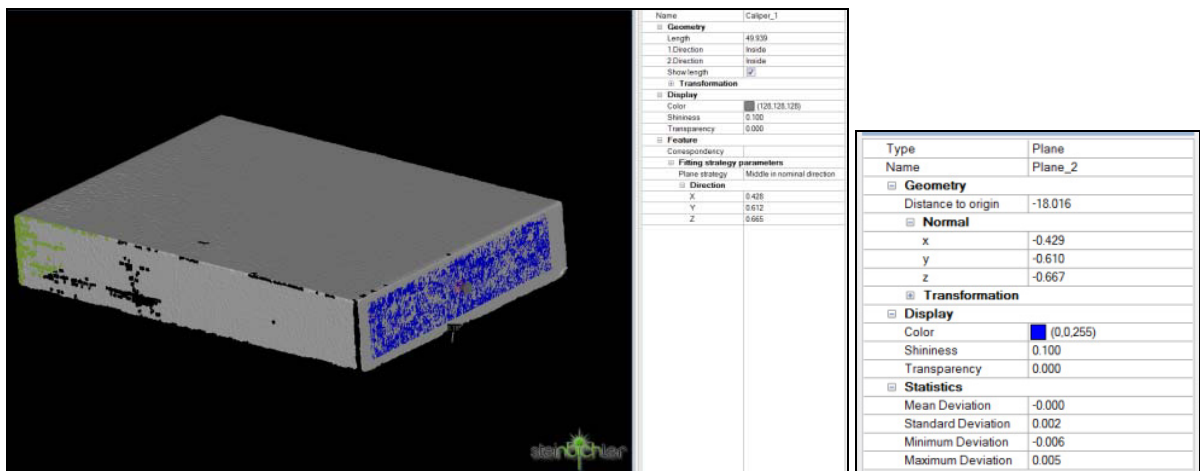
Plane approximation for measurement of 50 mm gauge block with Inspect+
